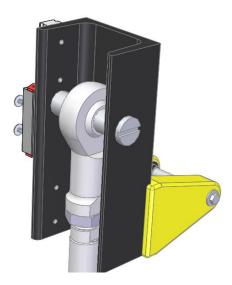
Shaft inserted and screwed through the rod eye into the sliding bracket.
